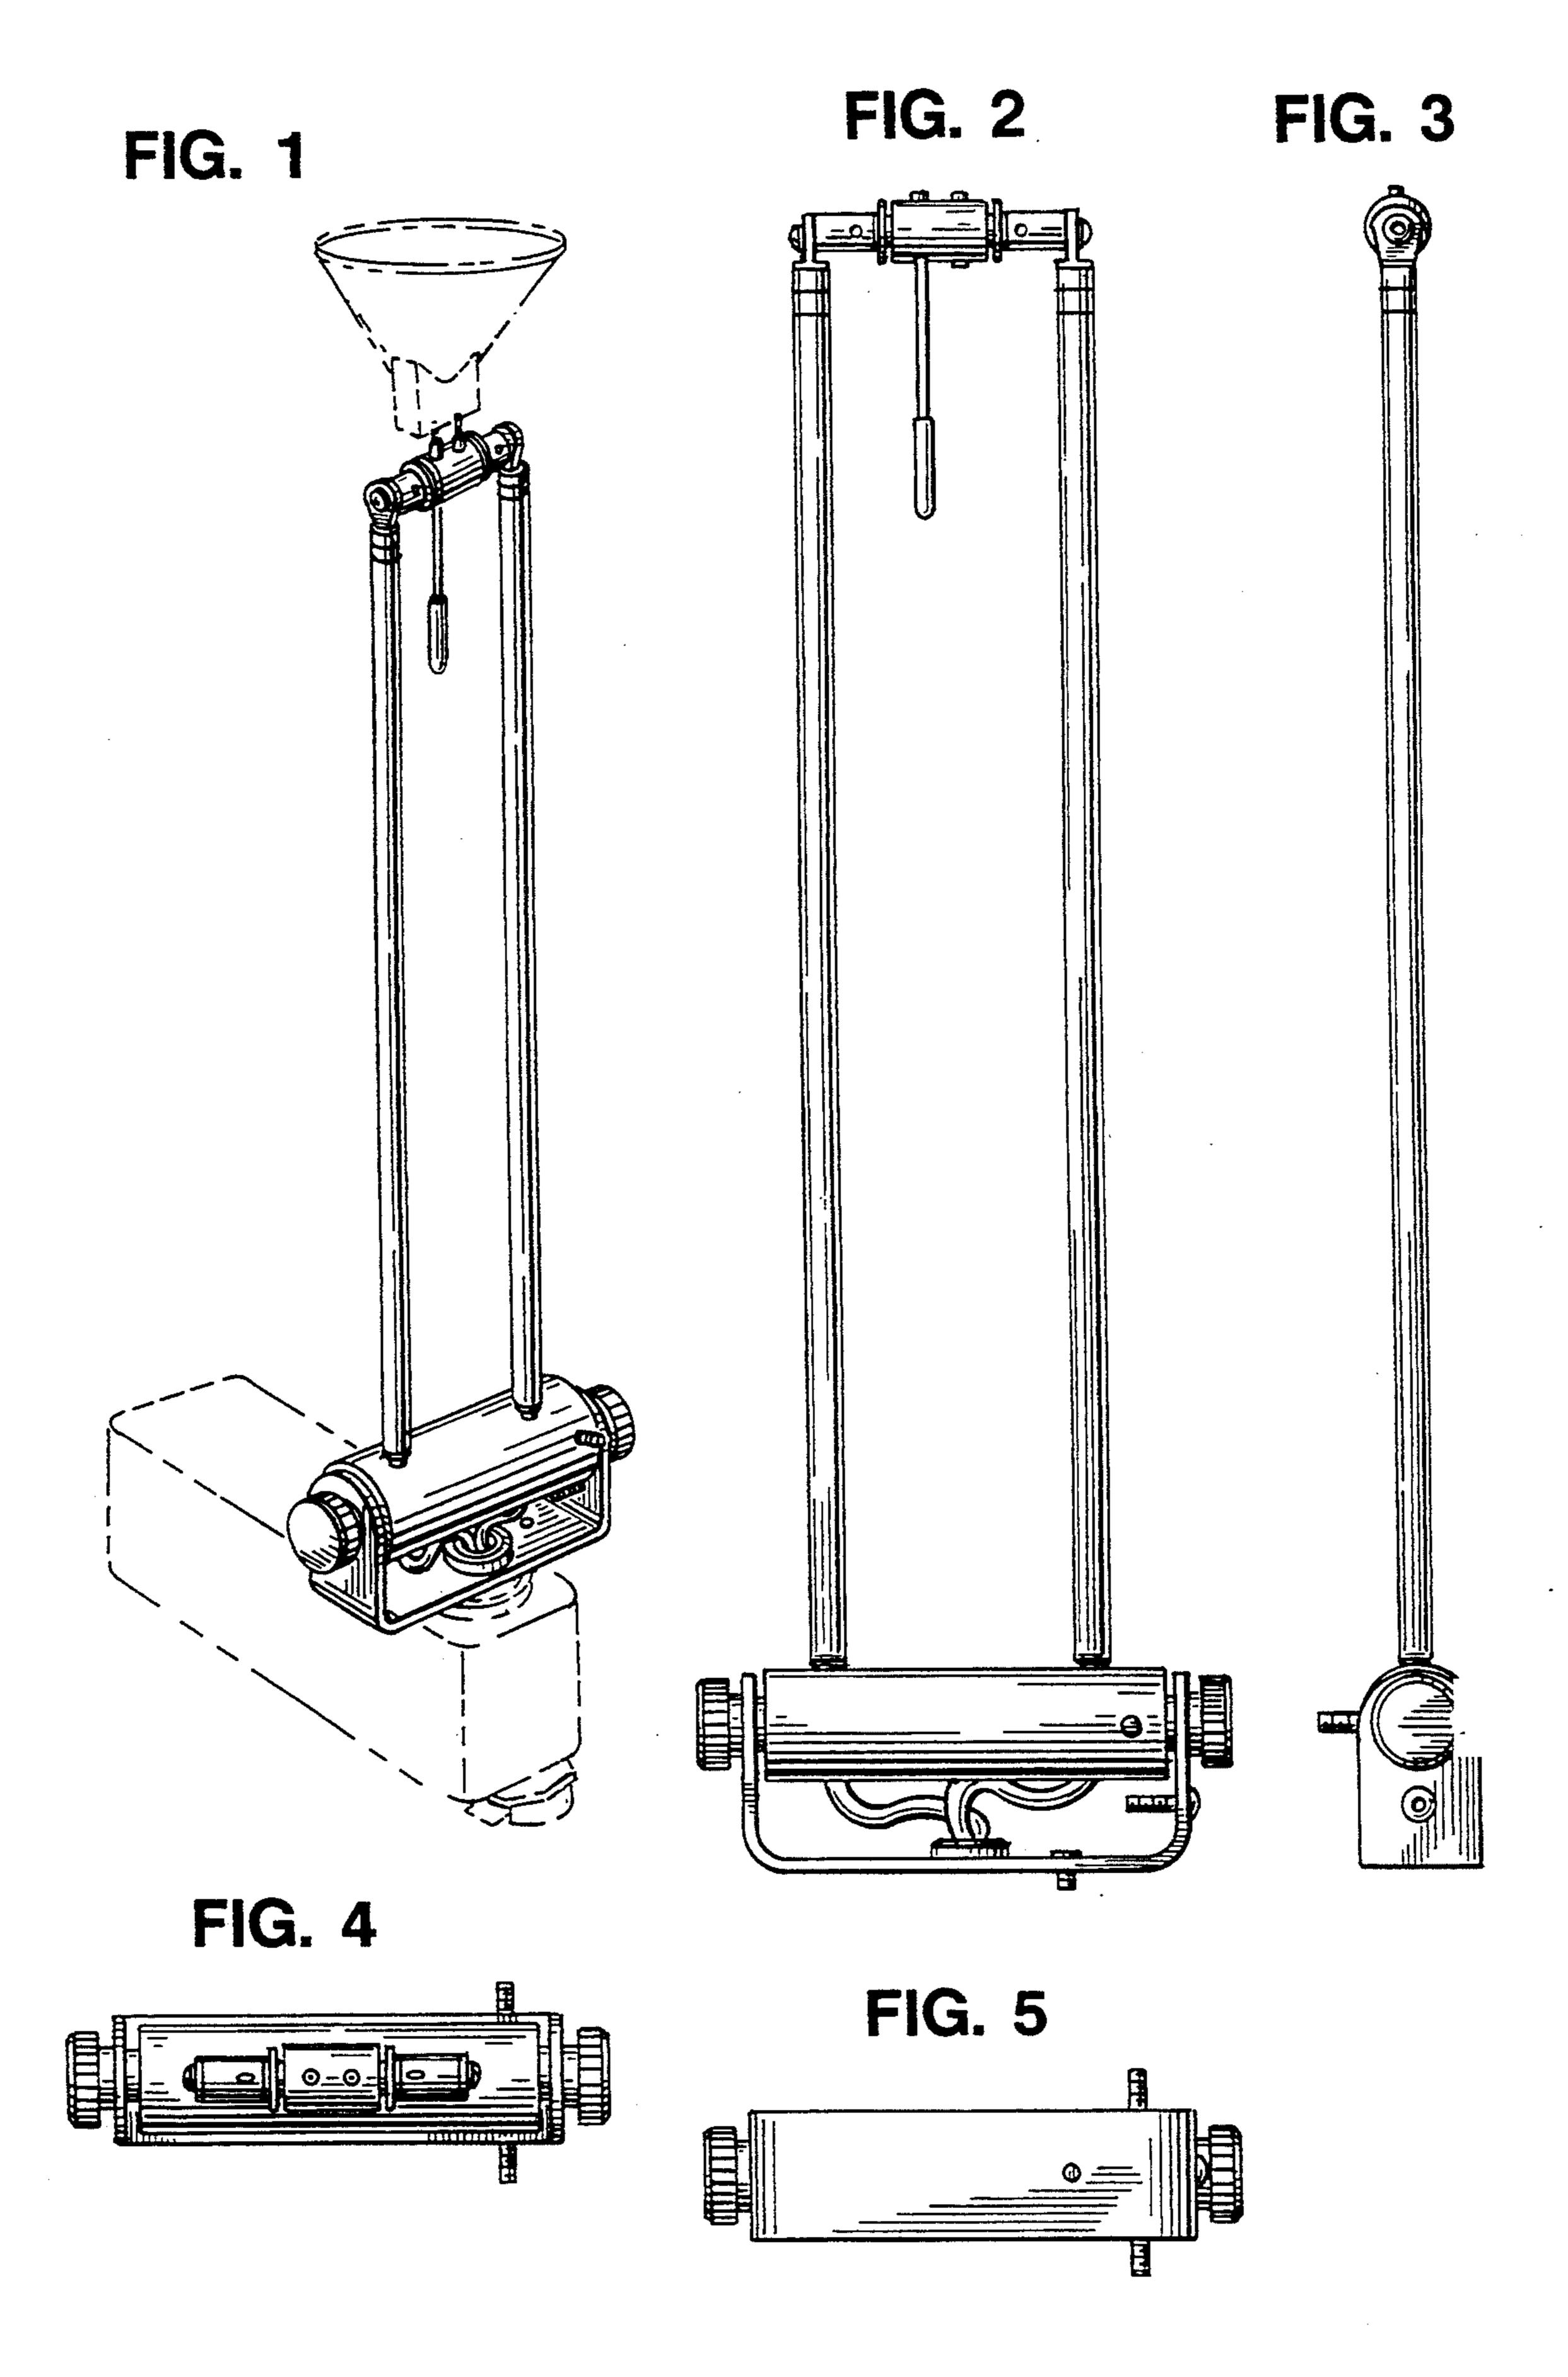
is a top view of the adjustable support arm for a lighting fixture taken from the perspective of FIG. 2. FIG. 5 is a bottom view of the adjustable support arm for a lighting fixture taken from the perspective of FIG.
